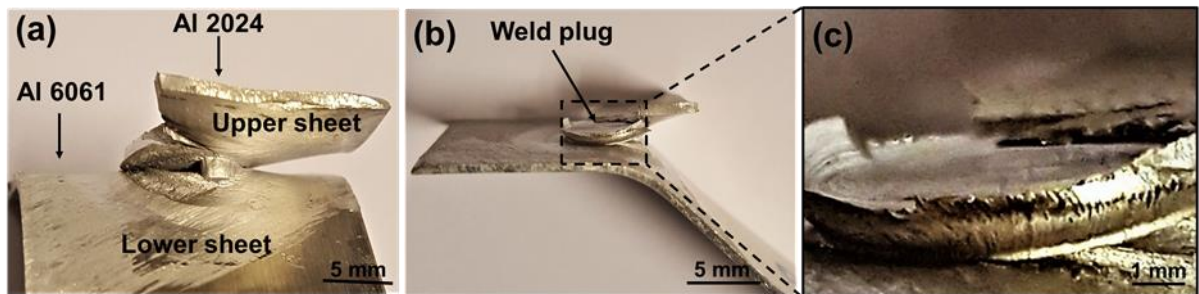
Fracture morphologies of the Al 2024-O welded joint after the shear-tensile test
